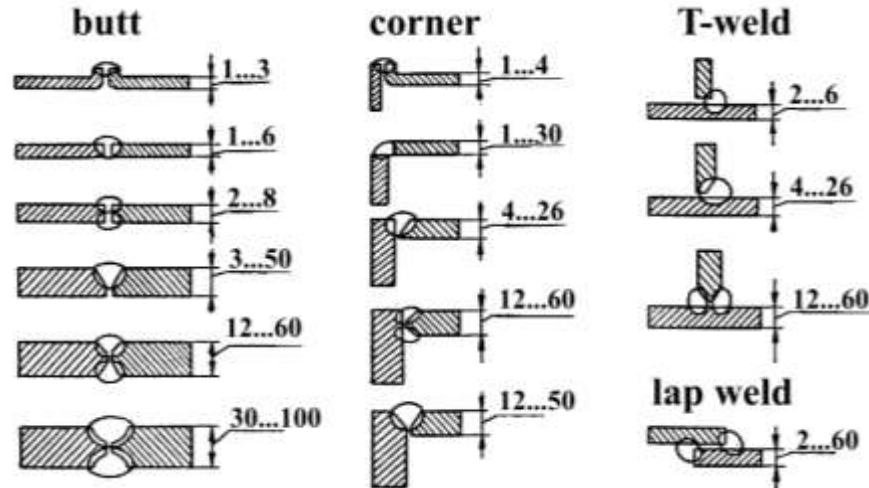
Basic types of welds produced by fusion welding (the figures are thickness of the parts be welded)
